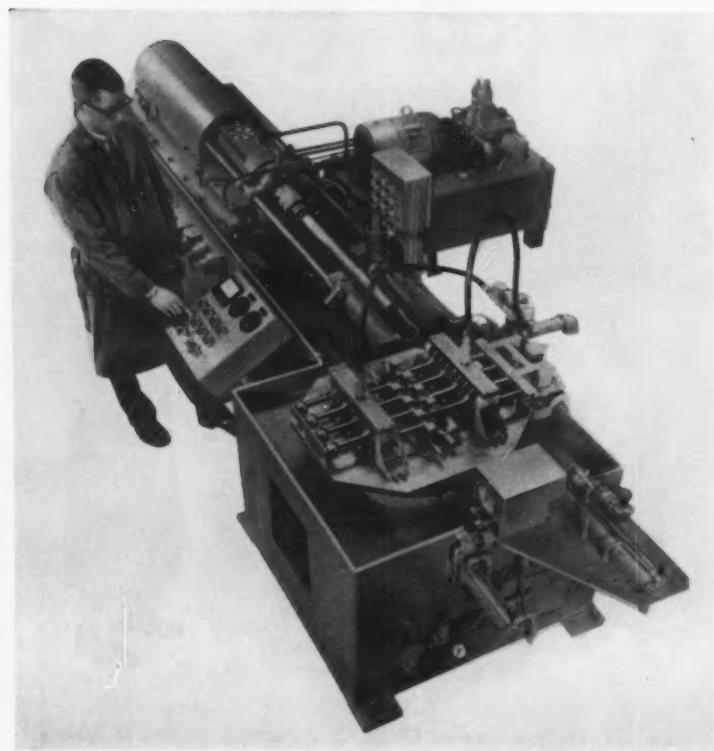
Model 2HRI-5 multiple-spindle machine equipped for Microhoning inner-ring ball tracks
